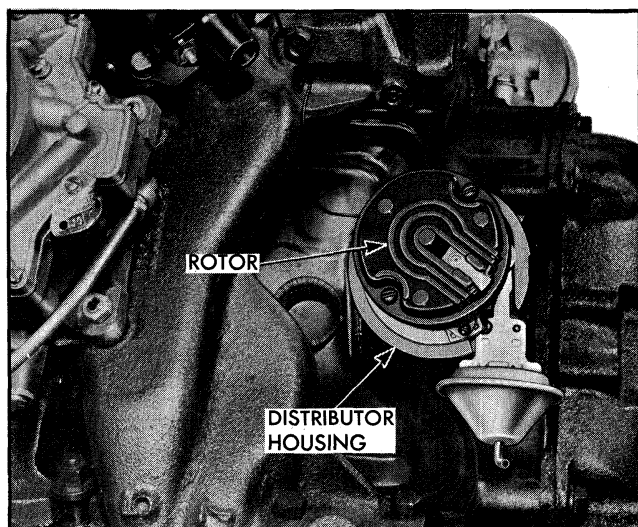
Relationship of Distributor Housing in Firing Position for No. 1 Cylinder
